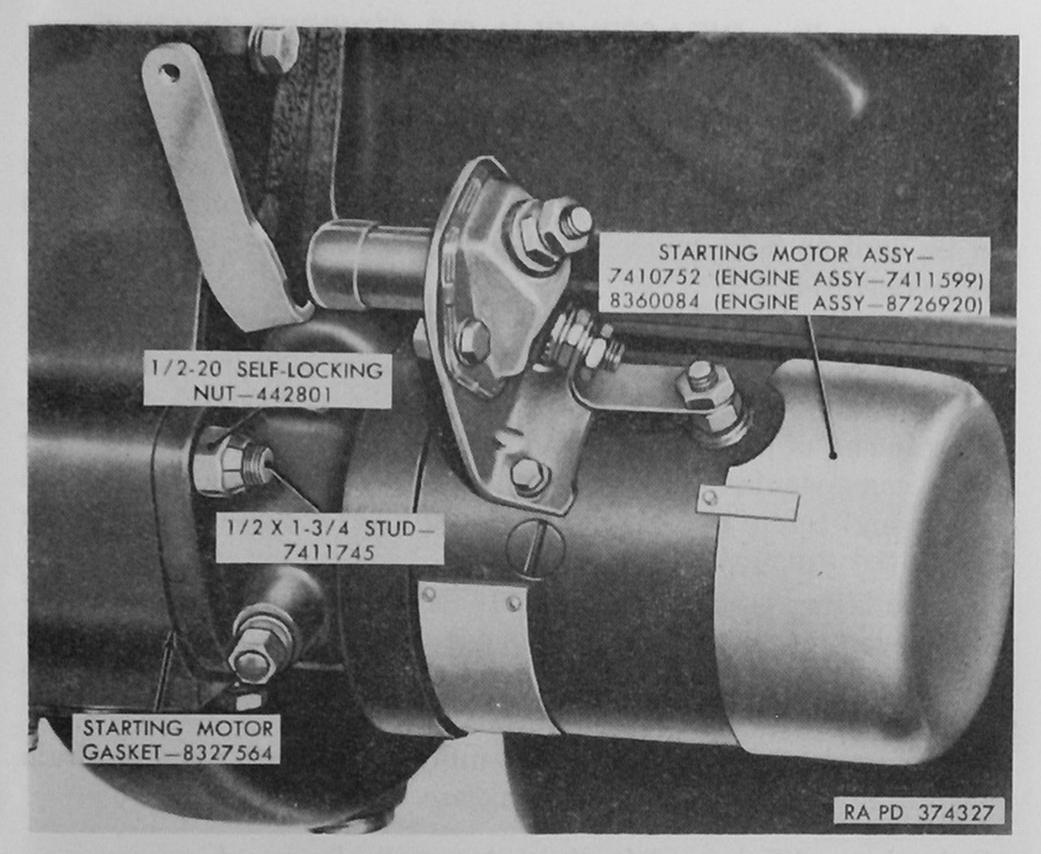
Starting motor ass.embly installed—engine assemblies 7411599 and 8726920
